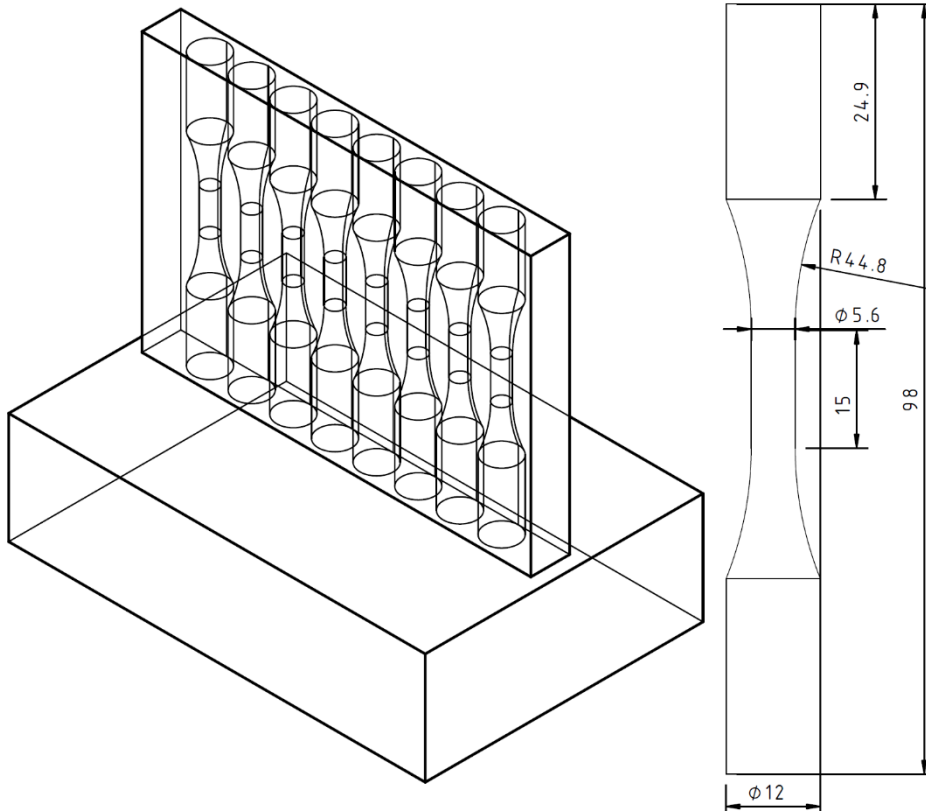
Extraction plan and specimen drawing for the fatigue samples from the block-like samples.
